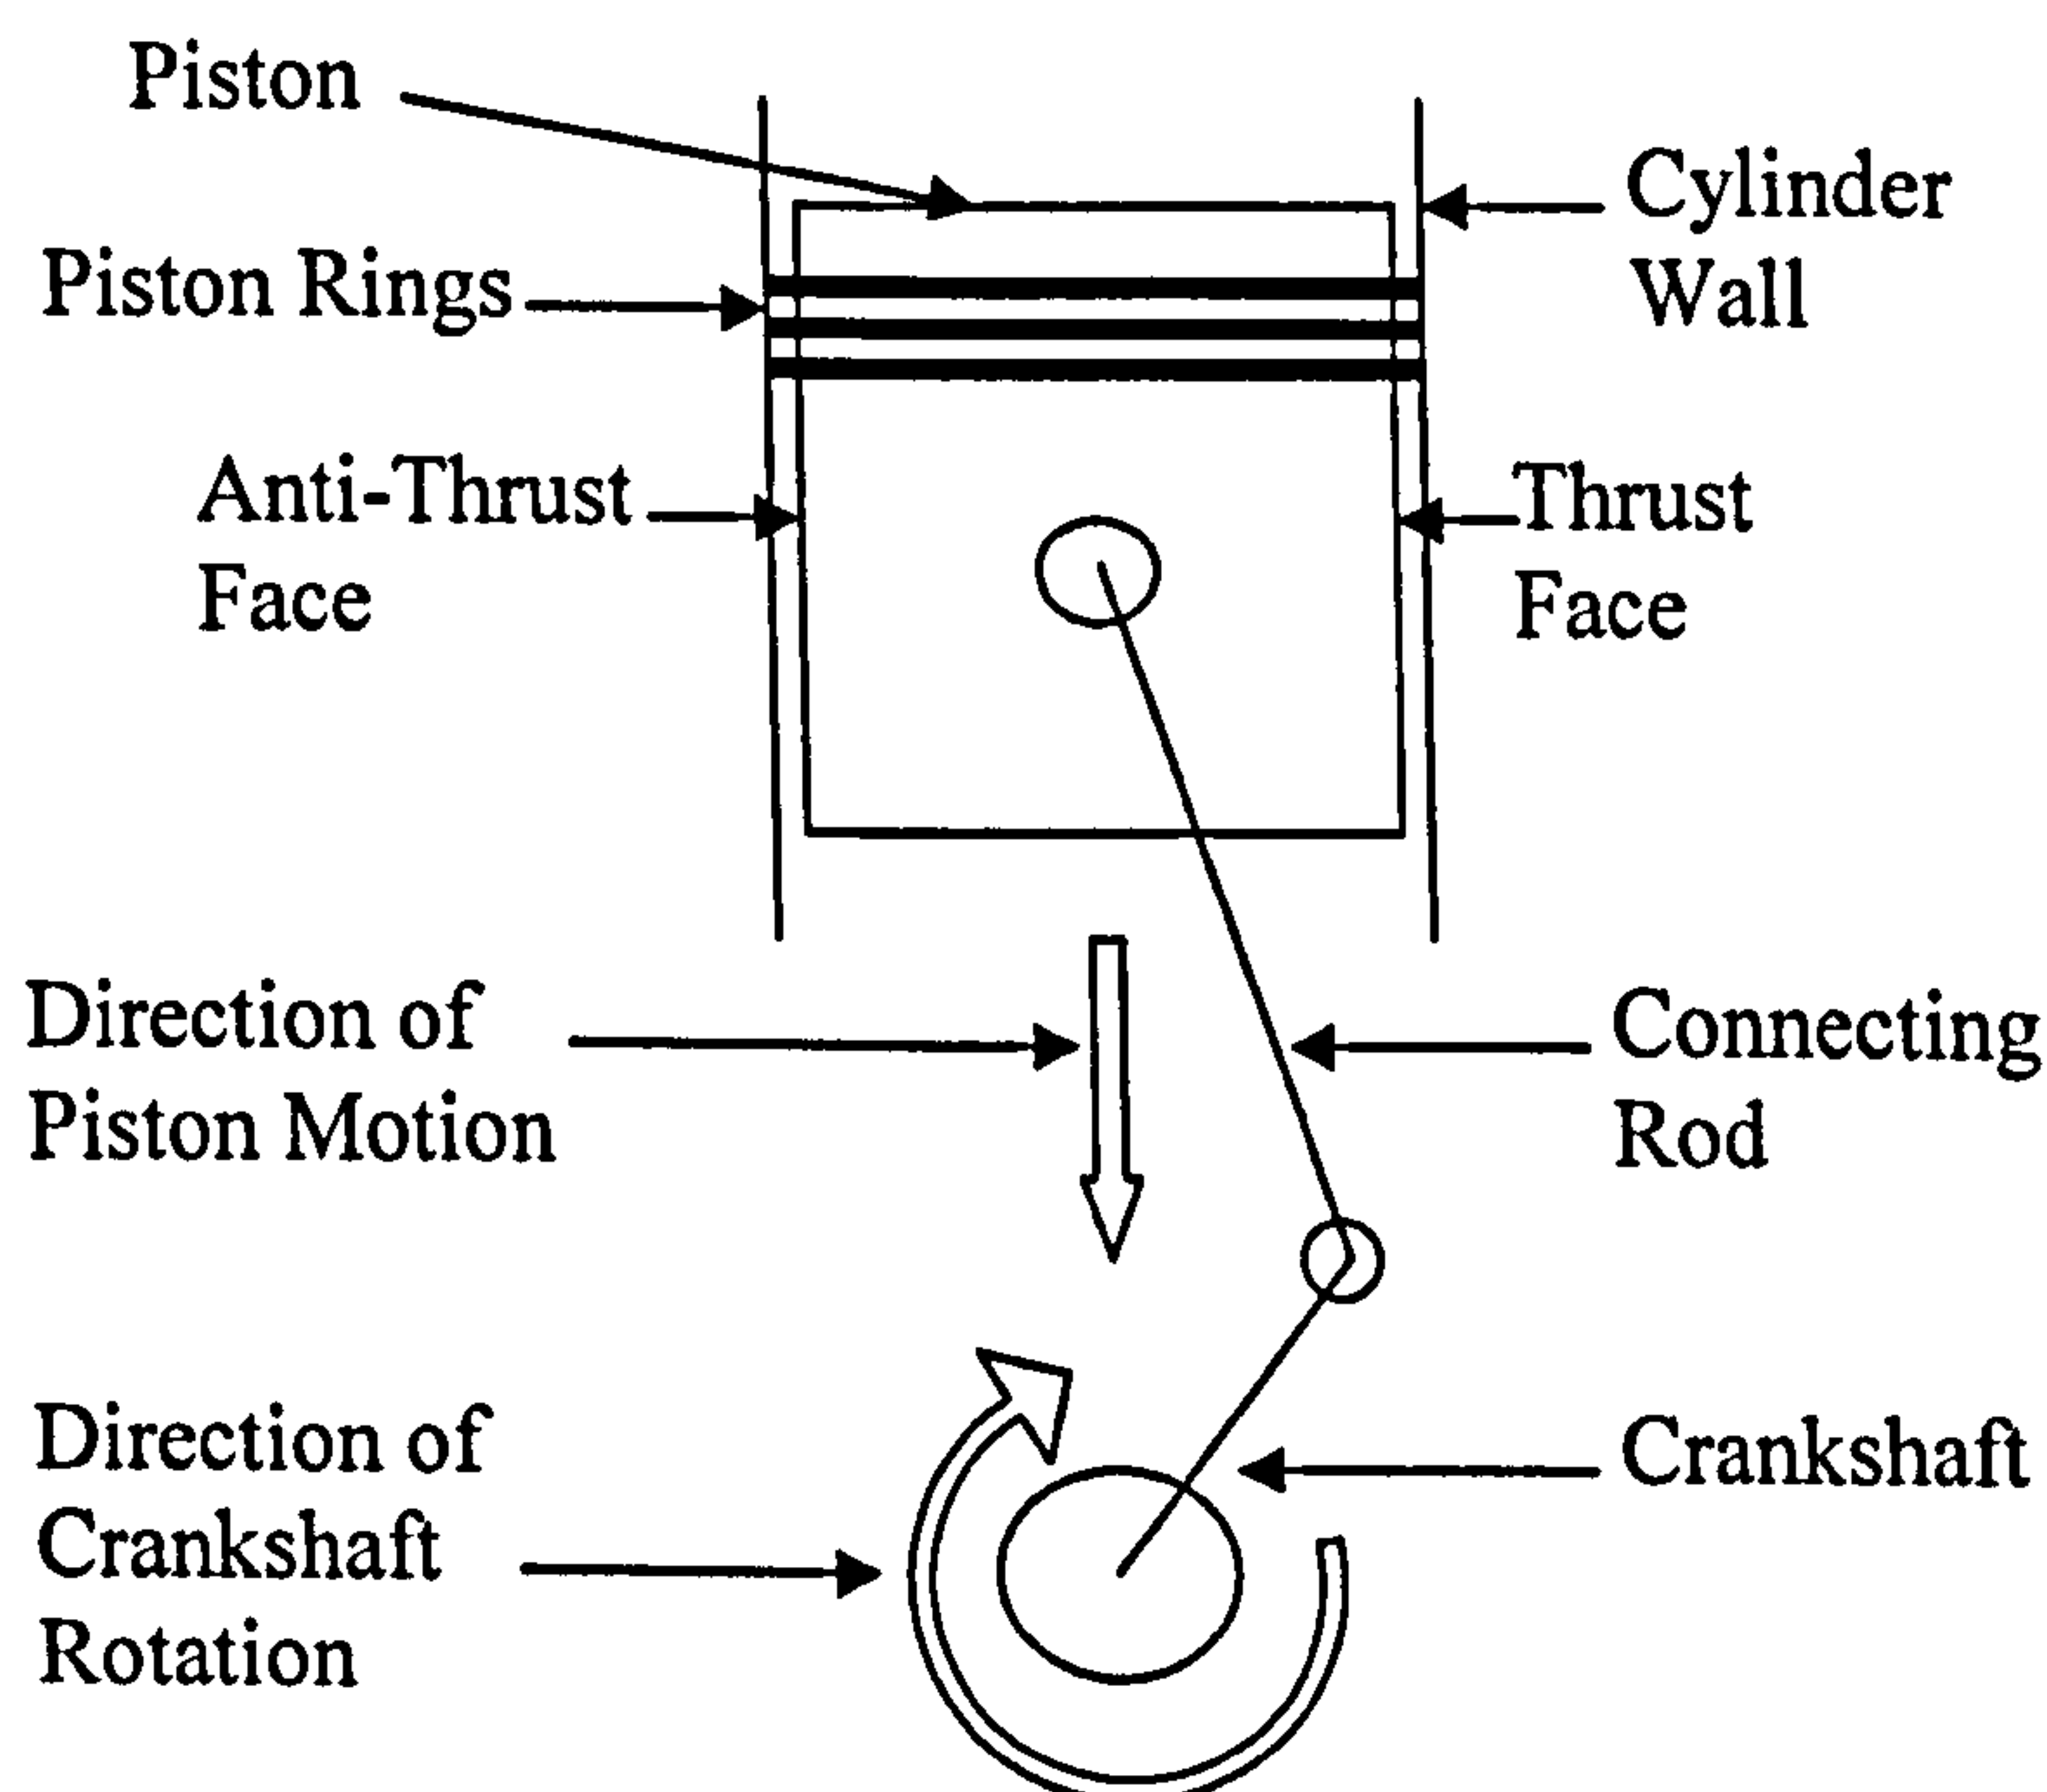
Schematic of Piston Motion, Highlighting Thrust and Anti-Thrust Faces.
